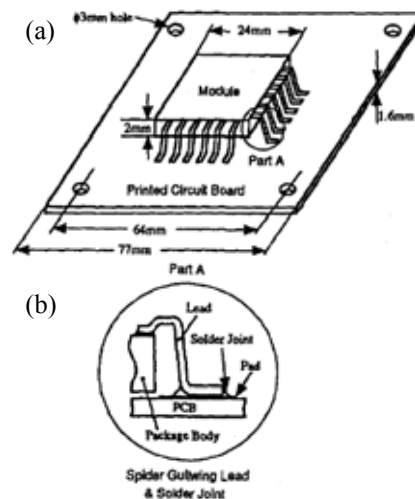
The specimen (a) PCB with a module attached in the center. (b) The detail of part A, showing a spider gullwing lead and solder joint
